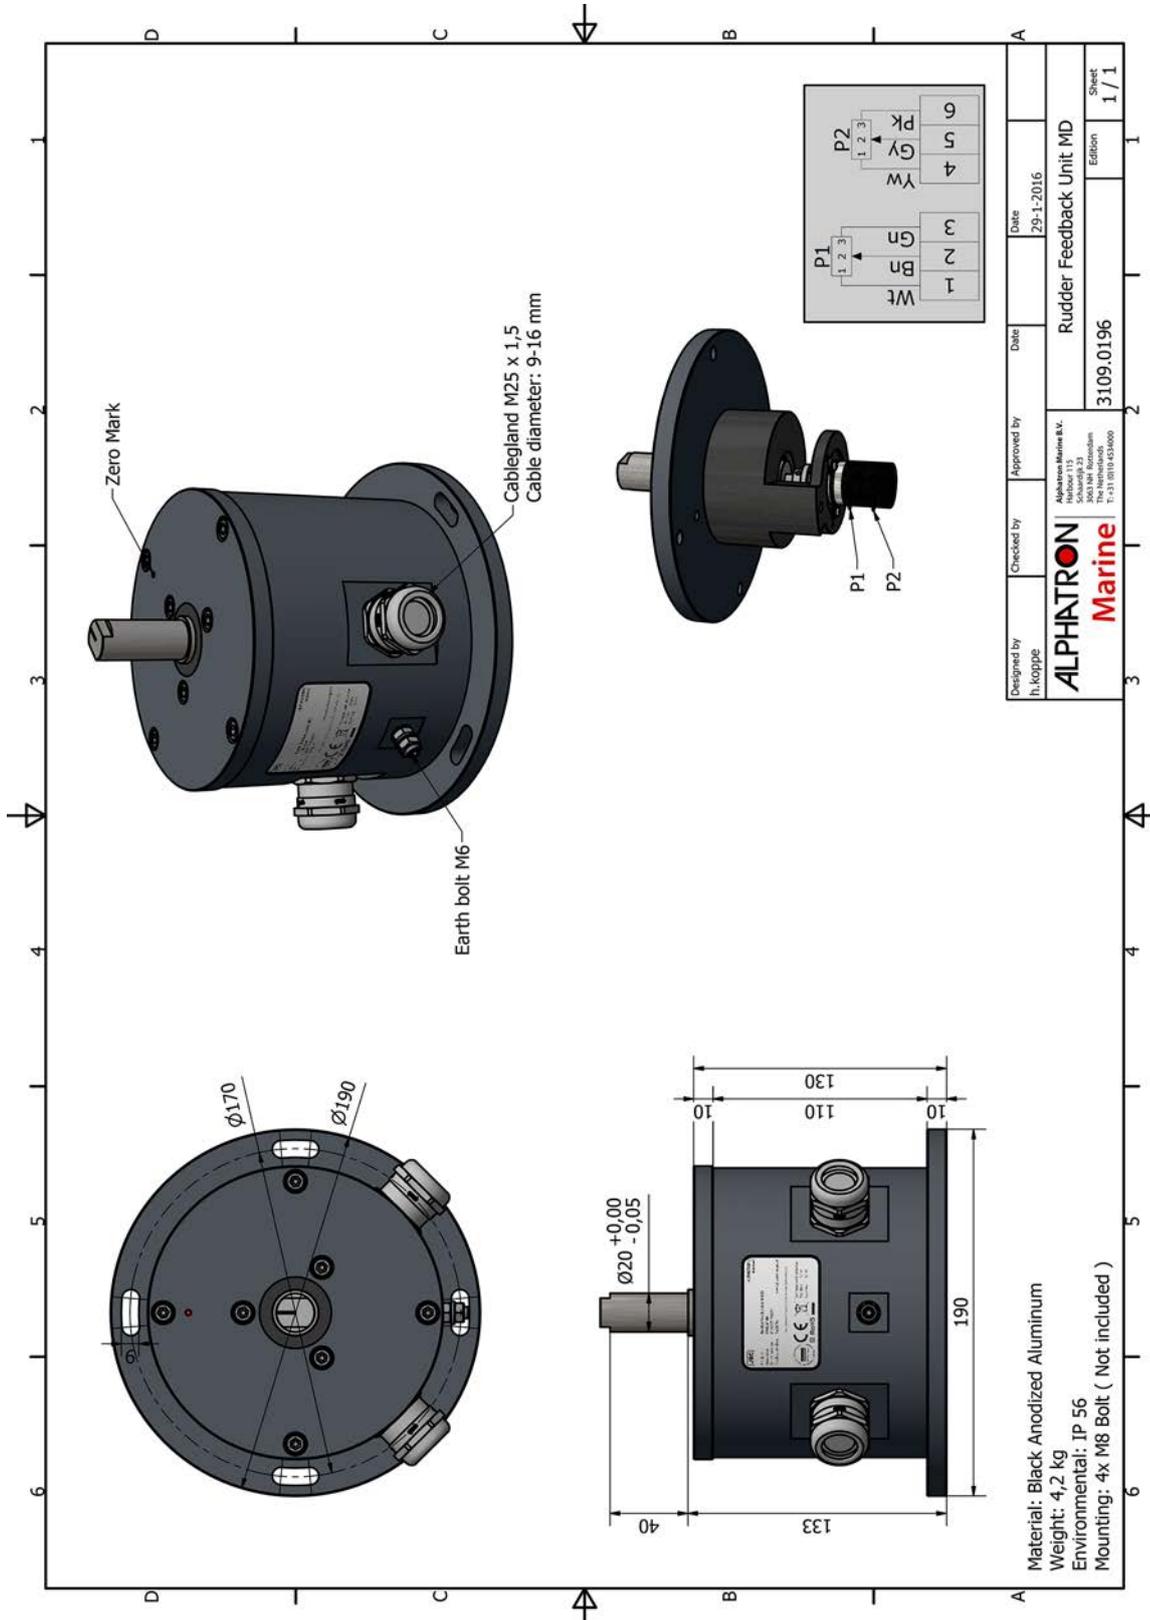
Mechanical Drawing Rudder Feedback Unit MD
